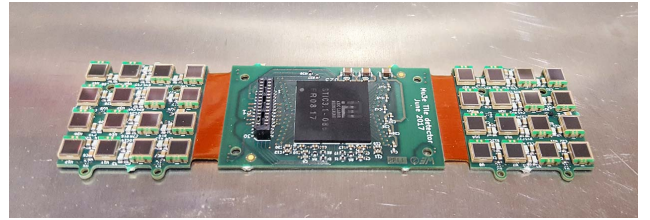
Tile matrix board assembled with SiPMs and a BGA packaged STiC 3.1 ASIC.
